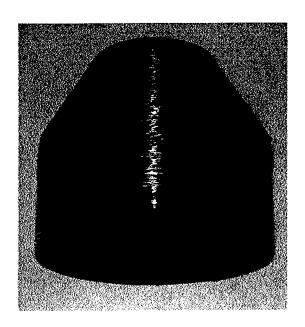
ZrC/W nozzle insert after it has been wrapped with carbon fibers, densified, and machined to size for the test motor
